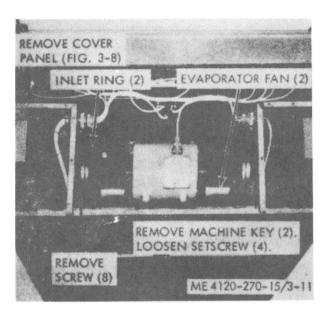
Evaporator fans and inlet ring, removal and installation.
